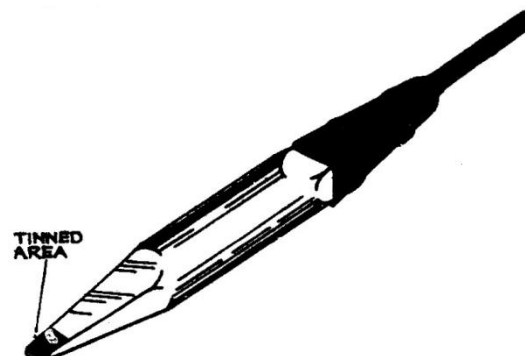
SOLDERING TOOL AFTER "TINNING".
